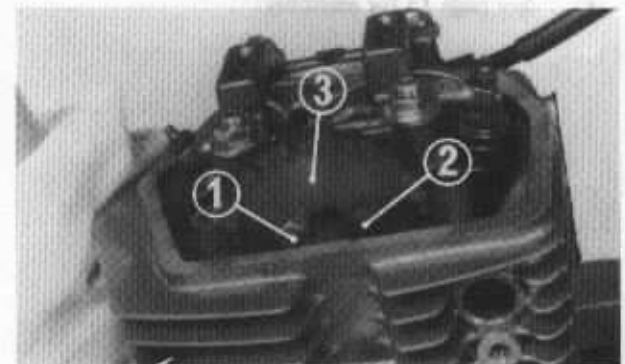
(1) 16 mm bolt (2) 6 mm dowel bolt
